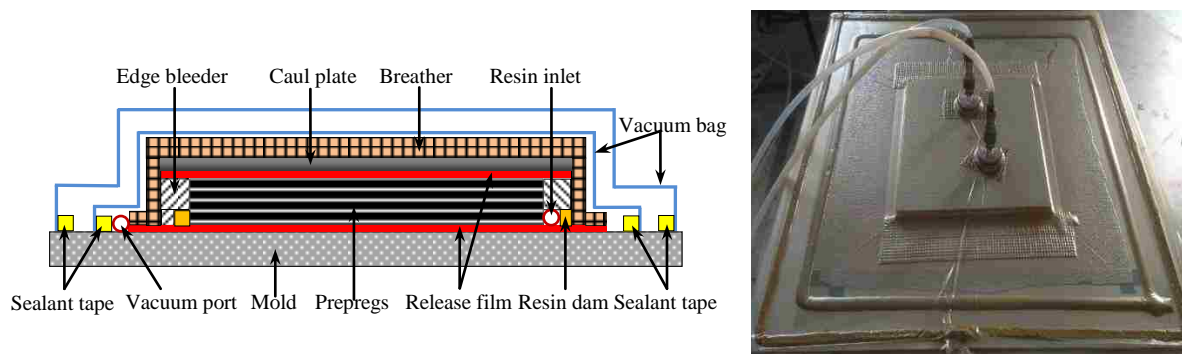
Schematic of out-of-autoclave process bagging assembly
